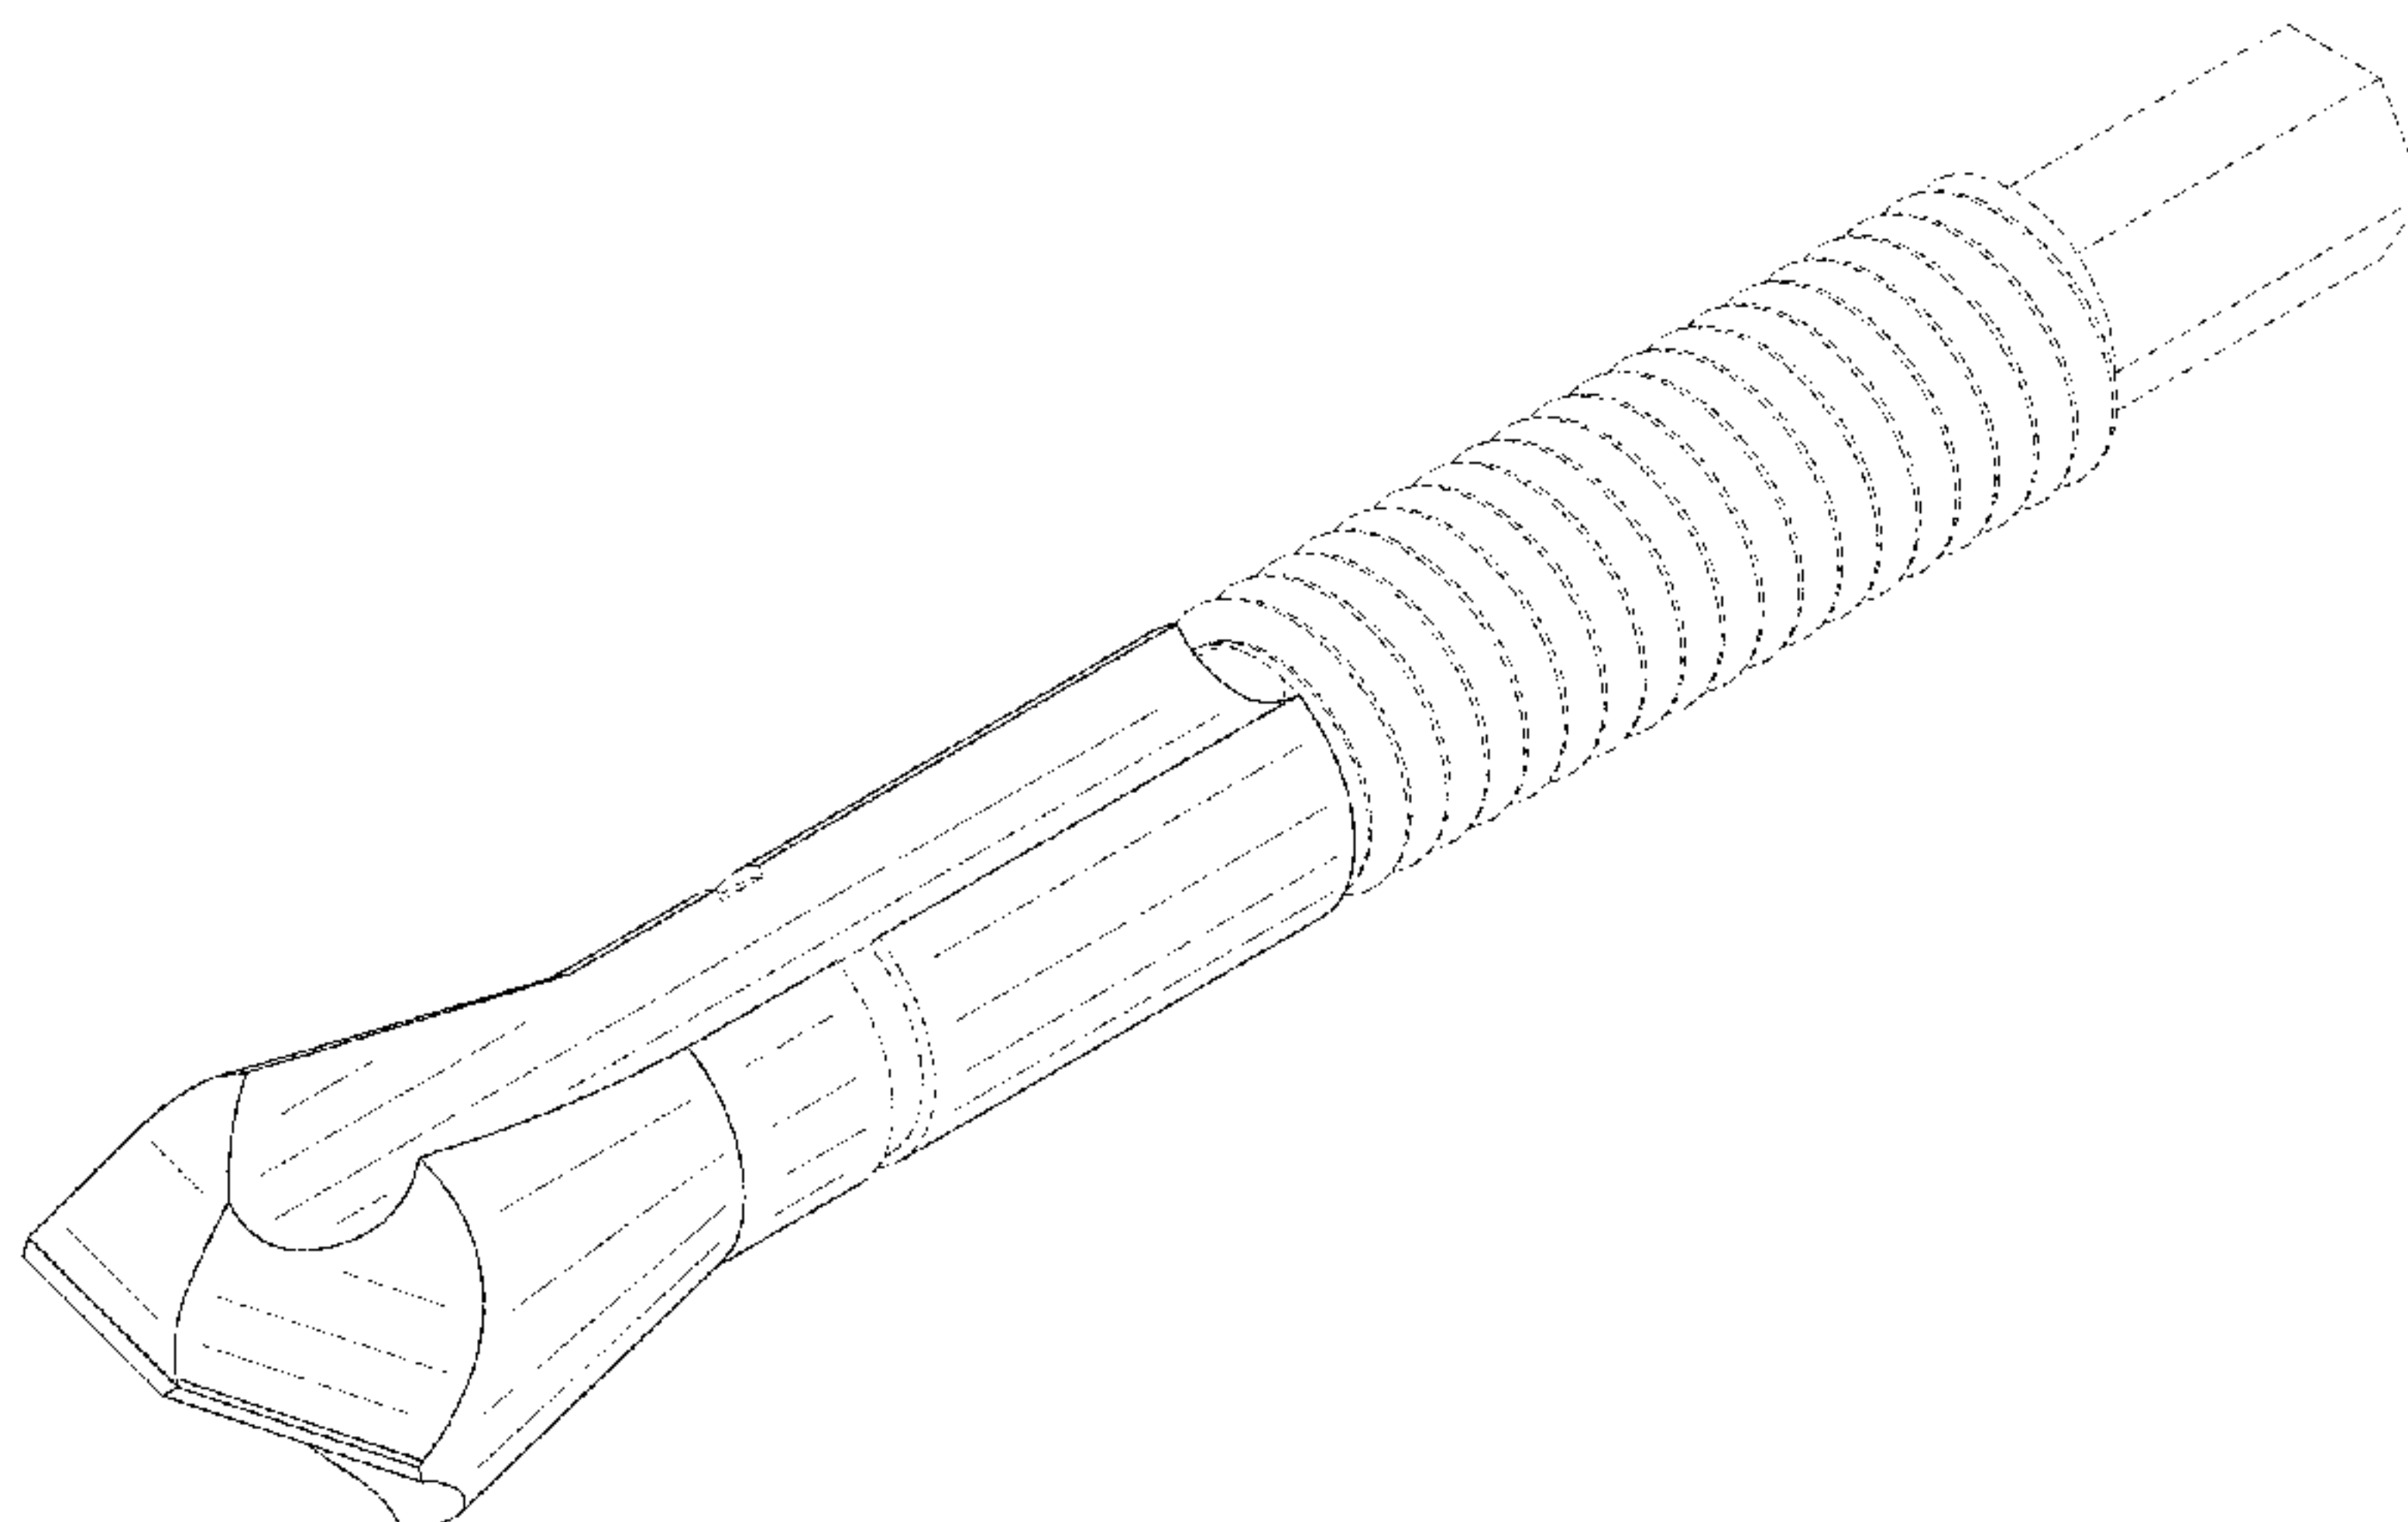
is a first side view of the anchor assembly drill bit of FIG. 1, the second opposite side view being a mirror image thereof.
